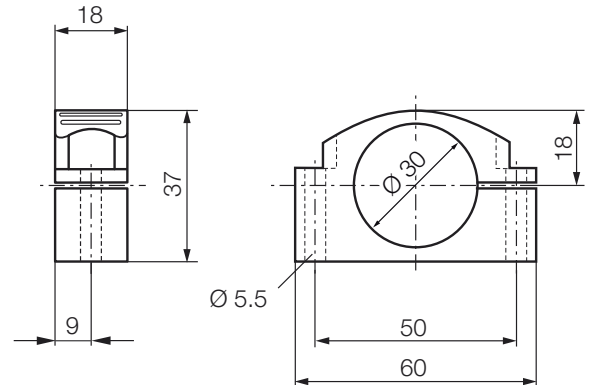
Mounting cuff BTL6-A-MF03-K-50
